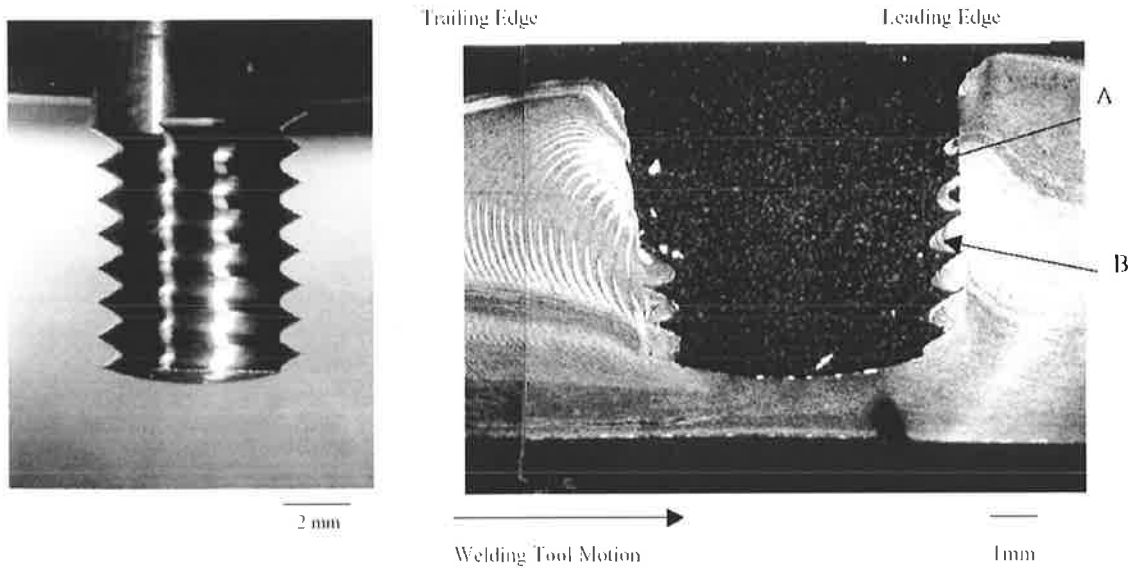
Left caption: Tungsten carbide welding tool pin. Right caption: Transverse section of keyhole [67].
